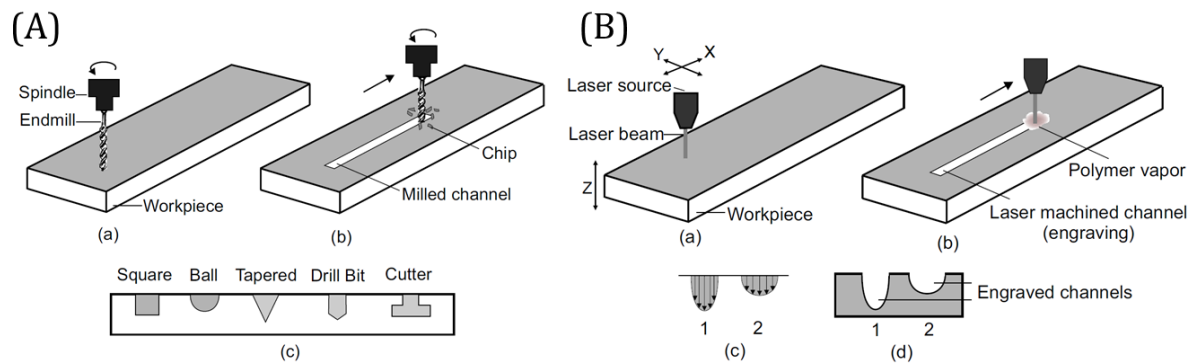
(A) Schematic showing a micromilling process and different profiles of material removal. (B) Schematic showing LASER ablation of polymer and the subsequent profiles of the formed channels formed. Adapted from [138]
